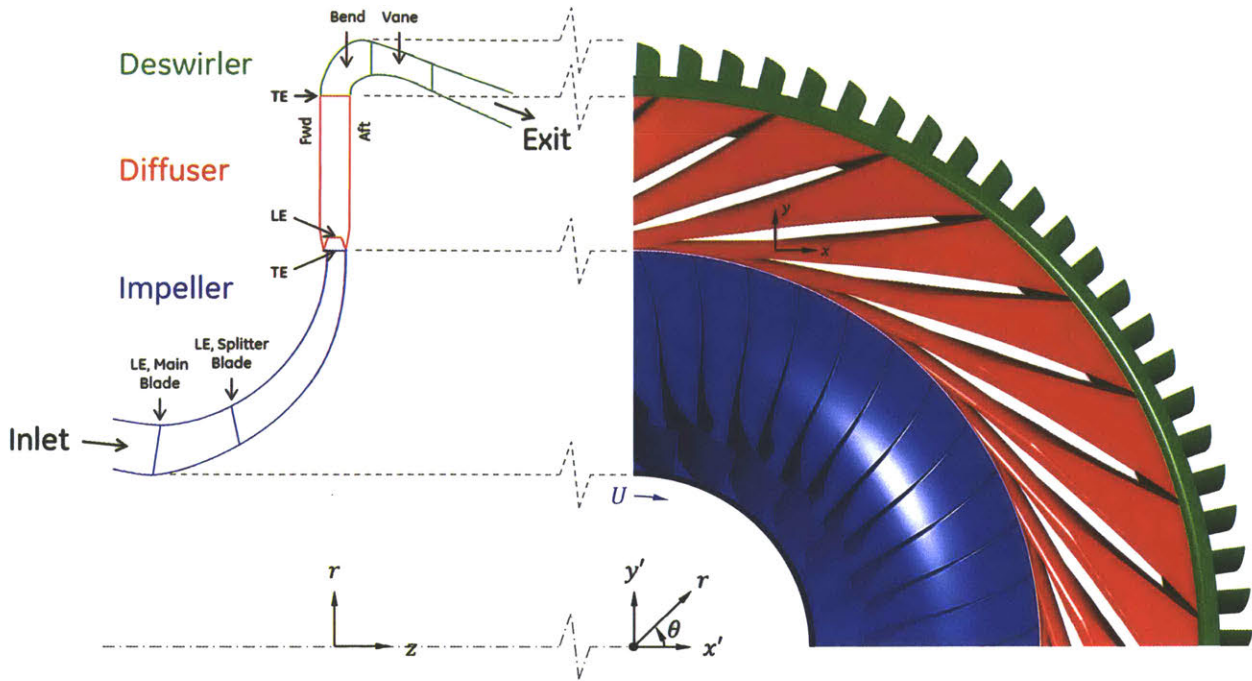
Side and front cutaway views of experimental centrifugal compressor with baseline diffuser.
